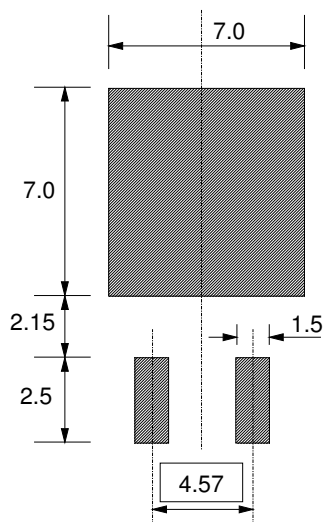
SOT428 : minimum pad sizes for surface mounting.
